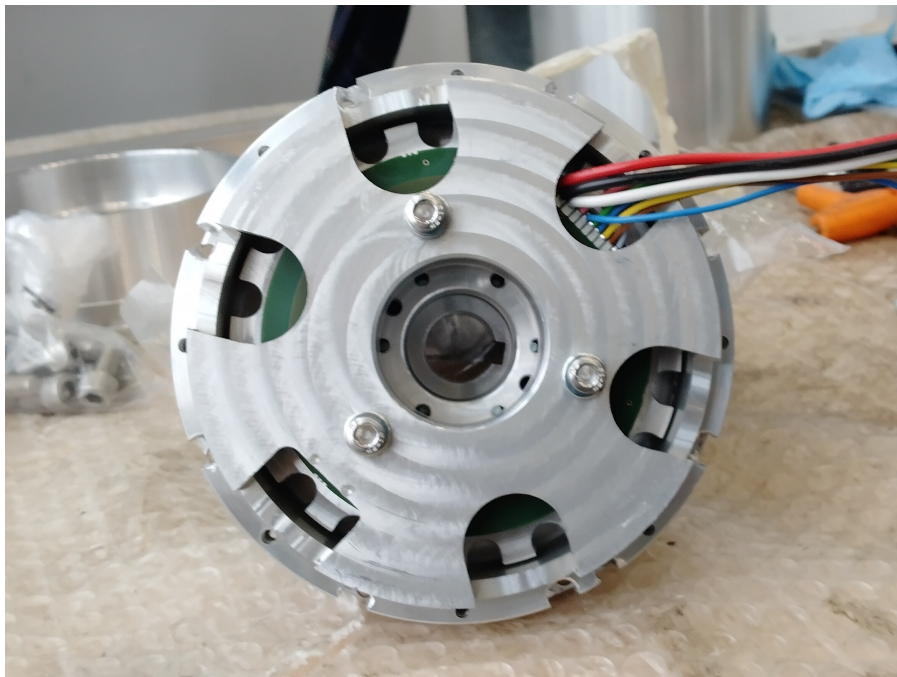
Detail of motor installation in drive casing. Circumferential slots allow to route motor cables outside the illustrated drive; central hollow hole is devoted to wiring of (potential) subsequent actuators.
